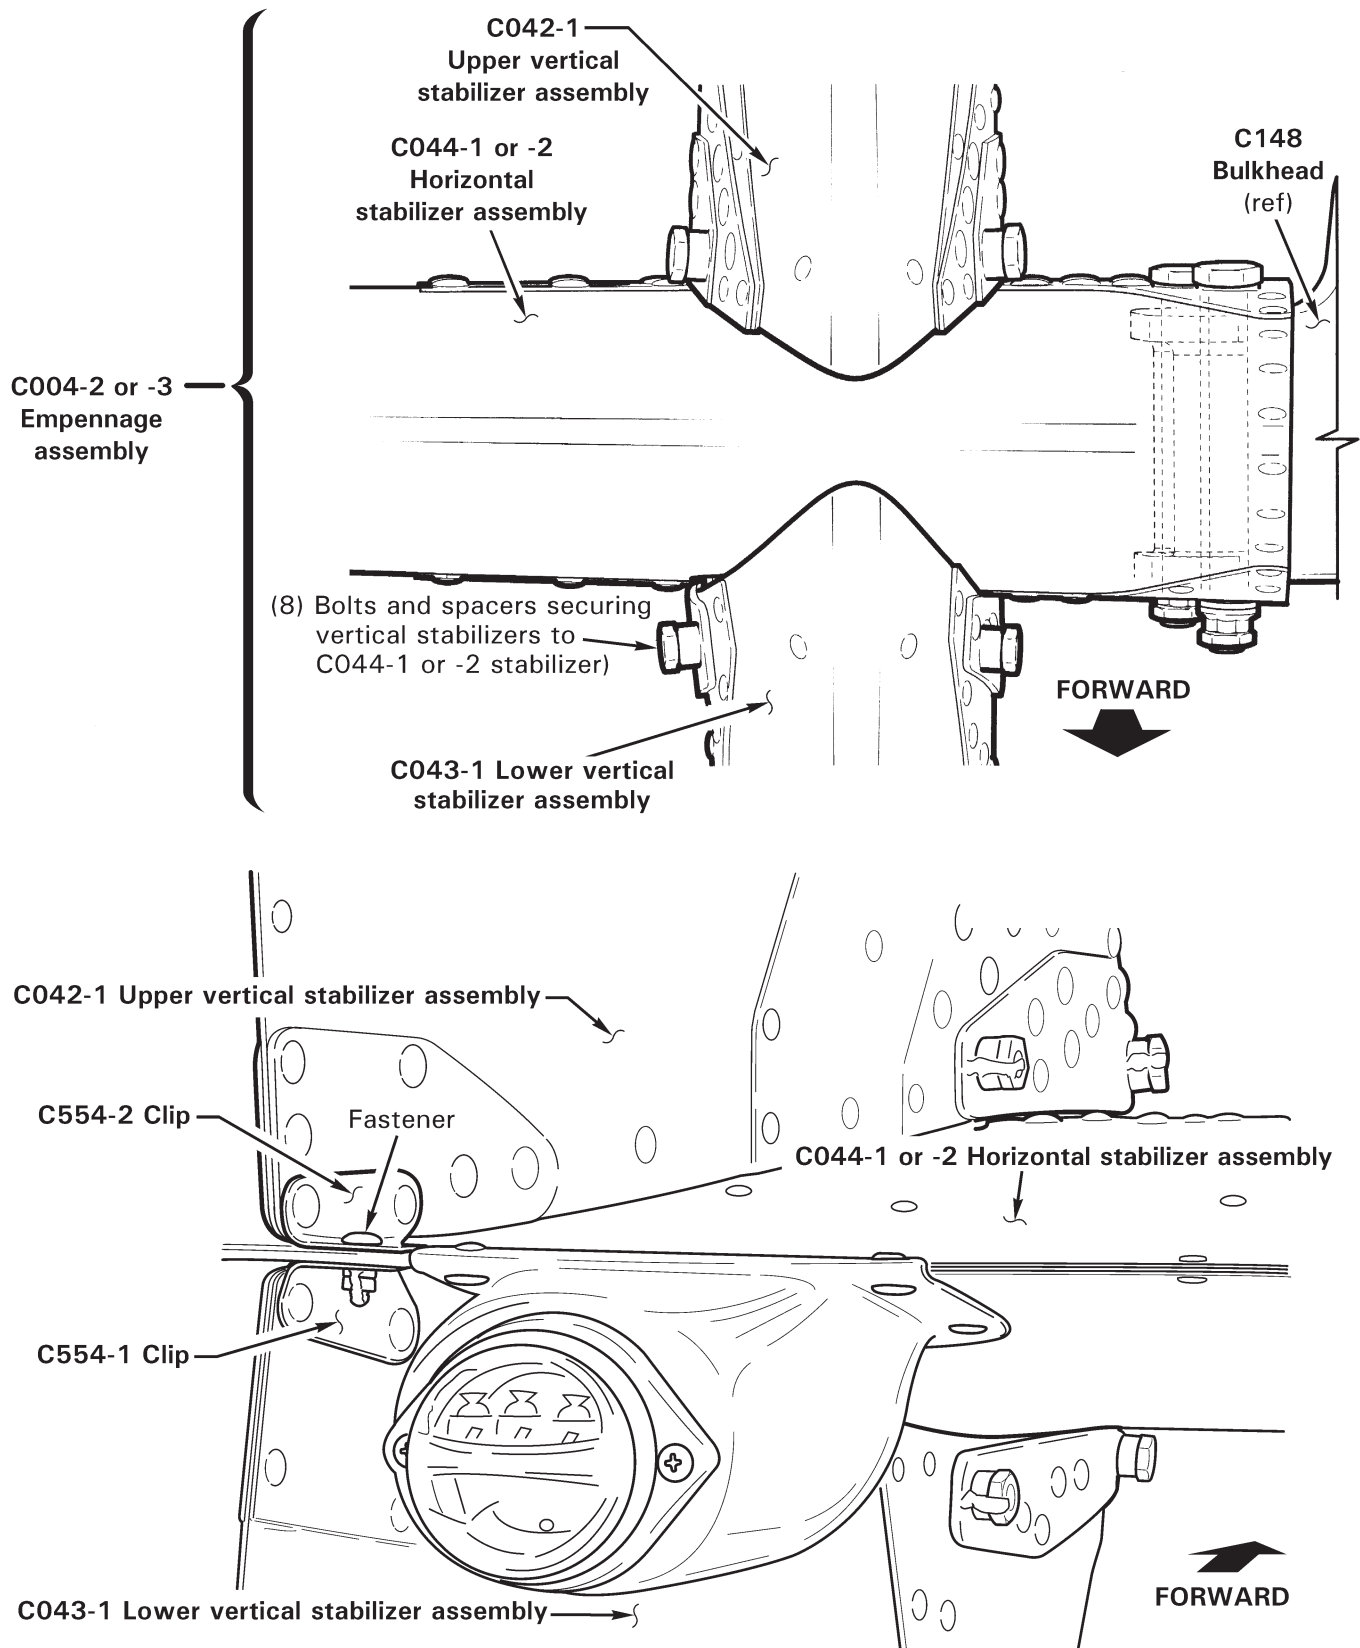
A C004-2 OR C004-3 EMPENNAGE ASSEMBLY
